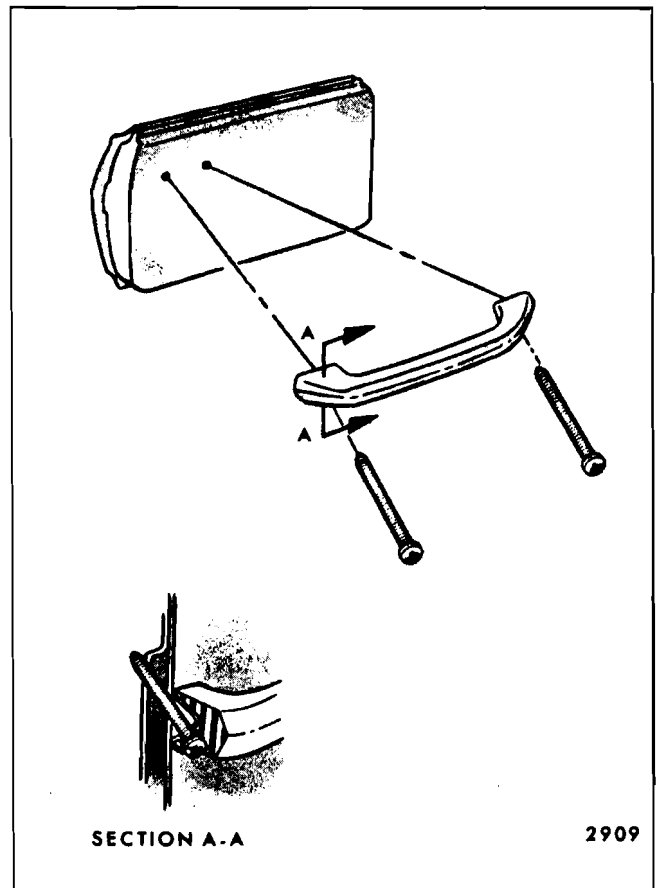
Door Pull Handle Attachment - "F" Styles
